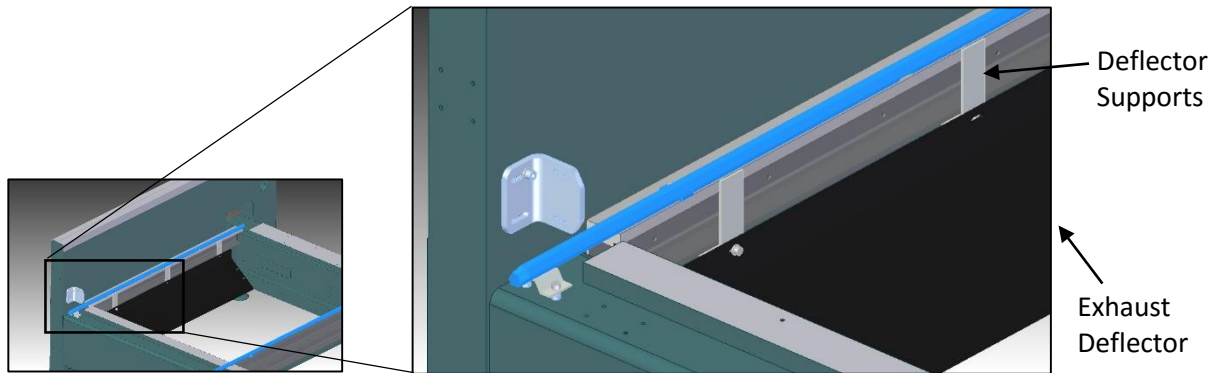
Support structures for the exhaust deflector (in black). Three components are welded providing the threaded holes for fixation of the deflector (using M8 screws).
